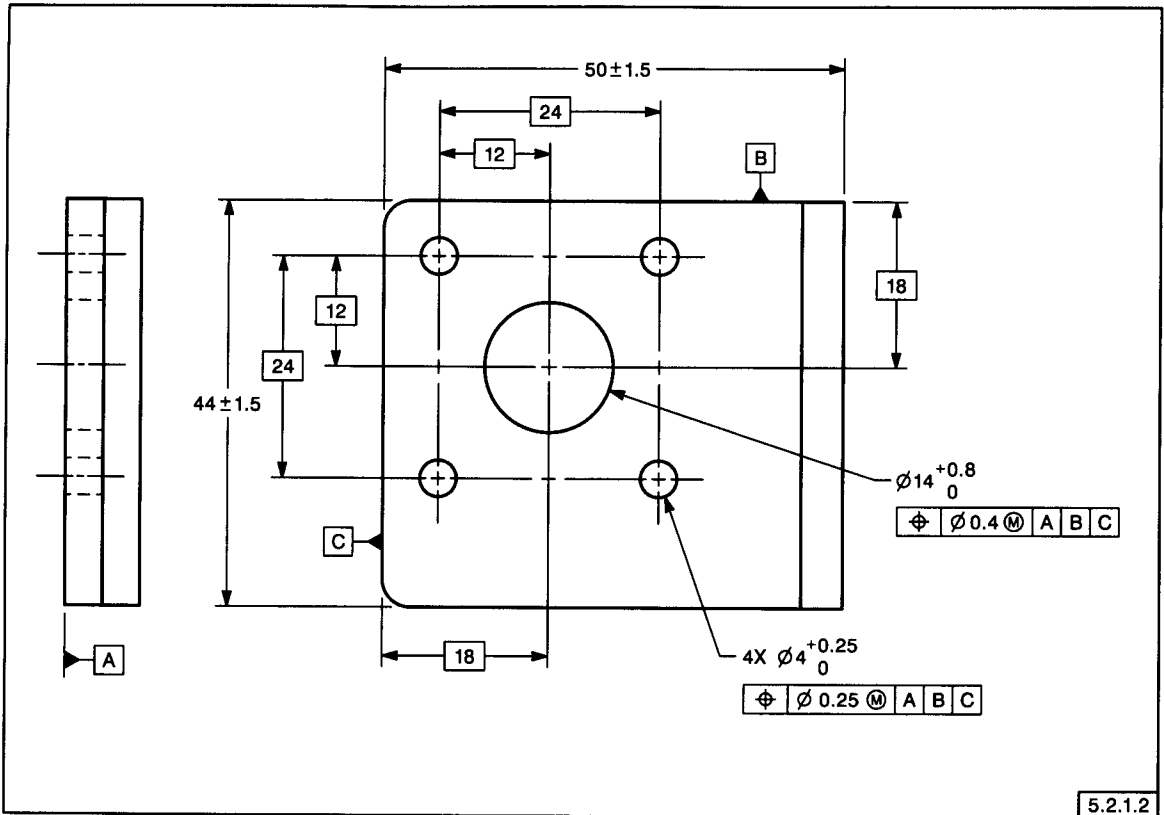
POSITIONAL TOLERANCING RELATIVE TO PLANE DATUM FEATURE SURFACES
